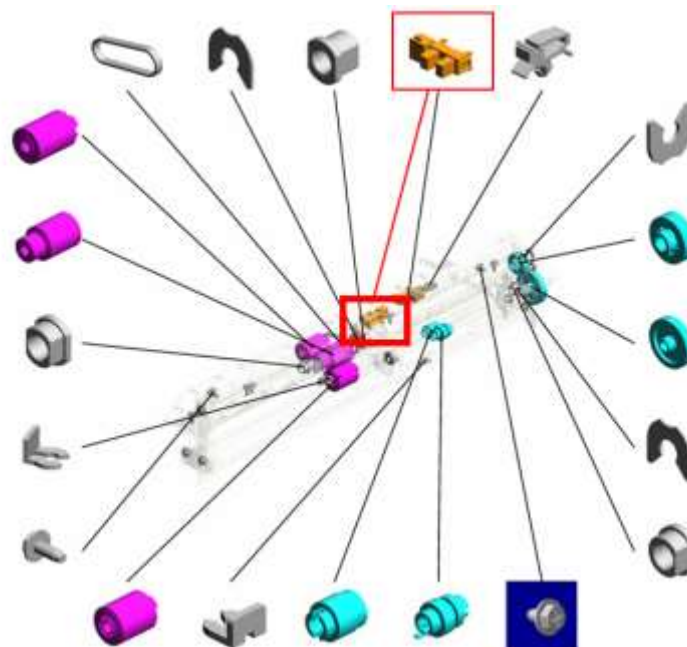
Position of the first U-shaped photoelectric sensor in the paper picking assembly [6]
